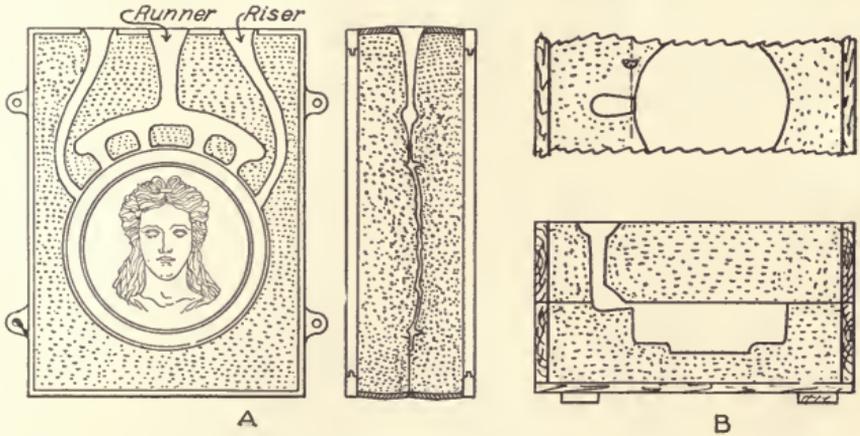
(A) Mold for Thin Plate.—(B) Mold for Heavy Plate.
